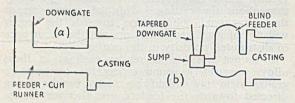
(a) Incorrect and (b) Correct Methods of Feeding a Casting through the Runner.
